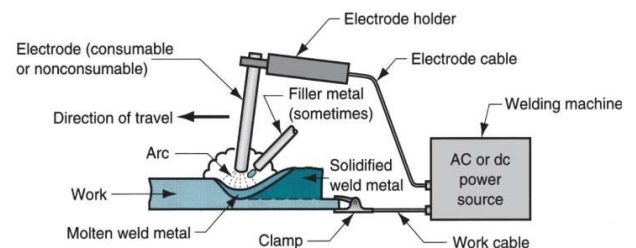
Diagram illustrating the arc welding equipment and process [3].
